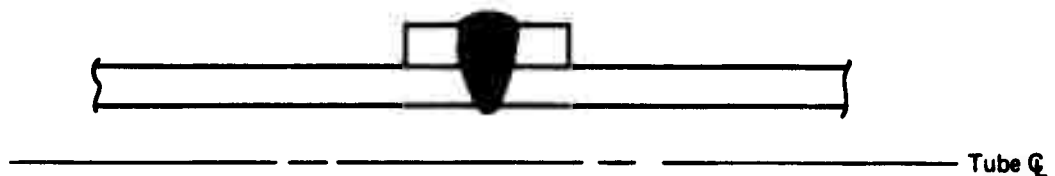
WELD BEAD CONFIGURATION FOR SINGLE MELT THROUGH BUTT JOINTS
